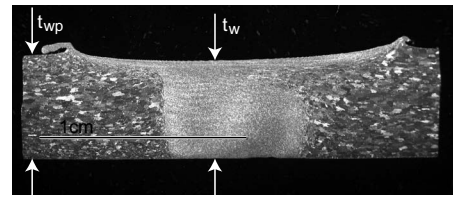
Weld cross section (AA 5083-H111 etched with modified Poulton's reagent)
